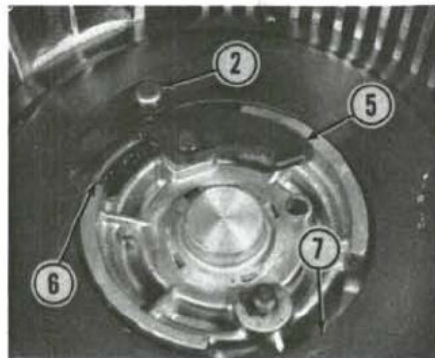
Springs (6) return pawls (5) to running (disengaged) position. Pawls may be lifted off after removing cover plate (1—Fig. 20) and unhooking springs (6). Inner cover (7) can be lifted off after pawls are removed.
